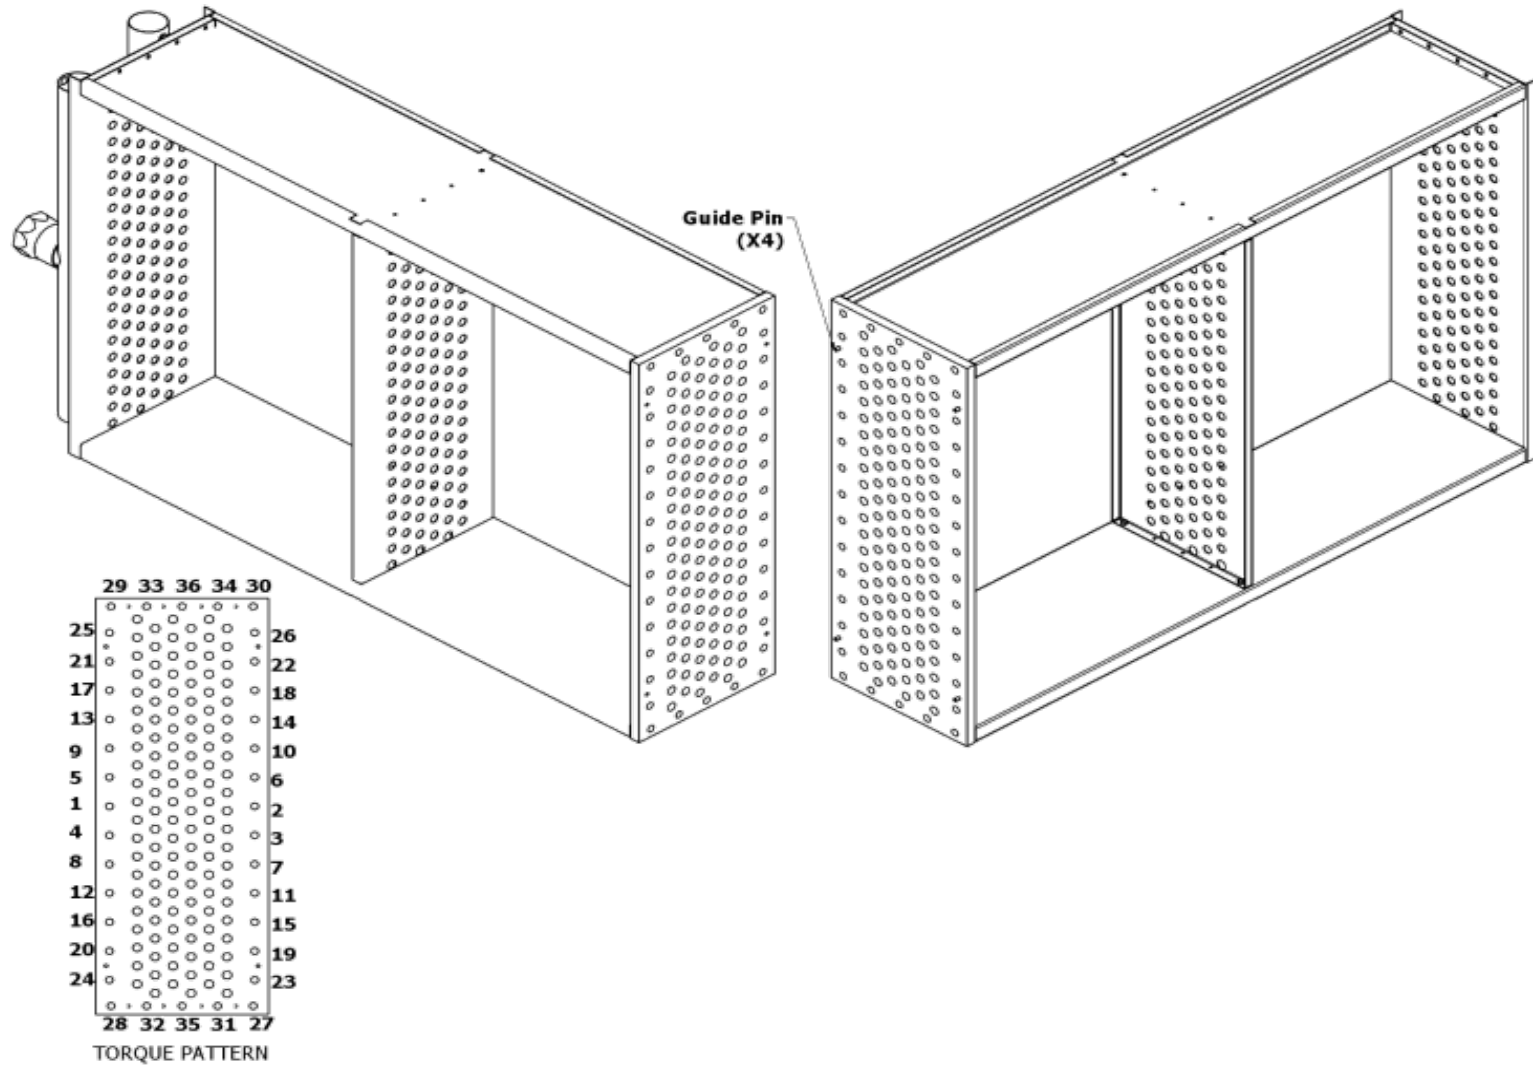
Representative Drawing of Sectional Coil Assembly with Torque Pattern
